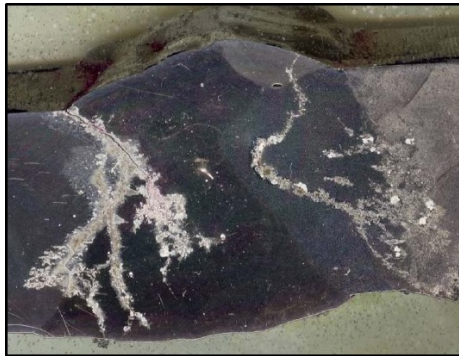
Liquid metal embrittlement failure on brazed aluminium heat exchanger [52].
